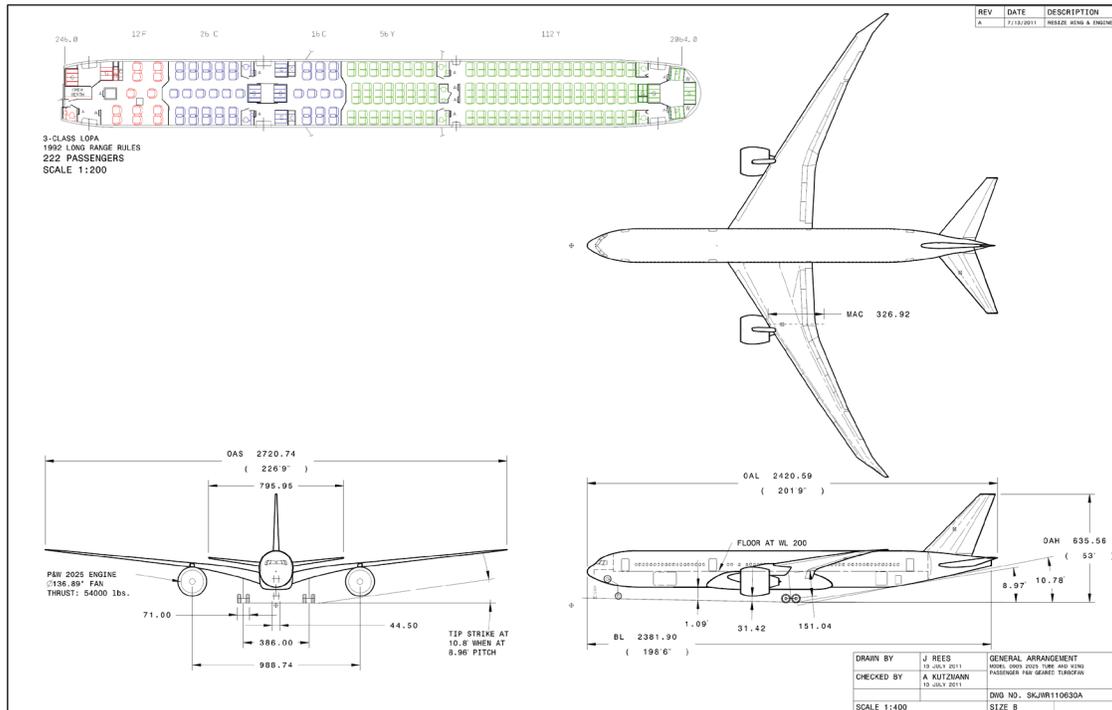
General Arrangement Drawing – 2025 T&W-0005 Passenger
